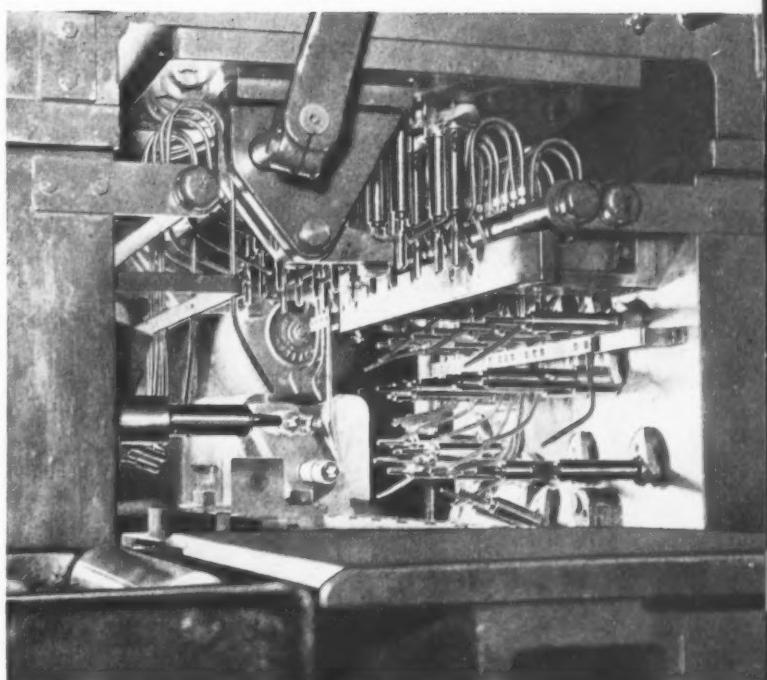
(Center) One of Two Special Machines Designed for Tapping the Numerous Holes in Cylinder Blocks
